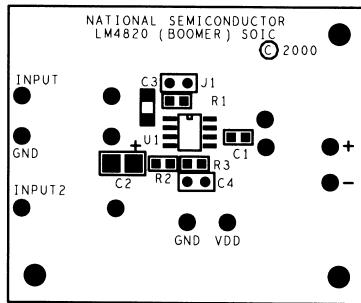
Reference Design Board and PCB Layout Guidelines - MSOP & SO Boards
